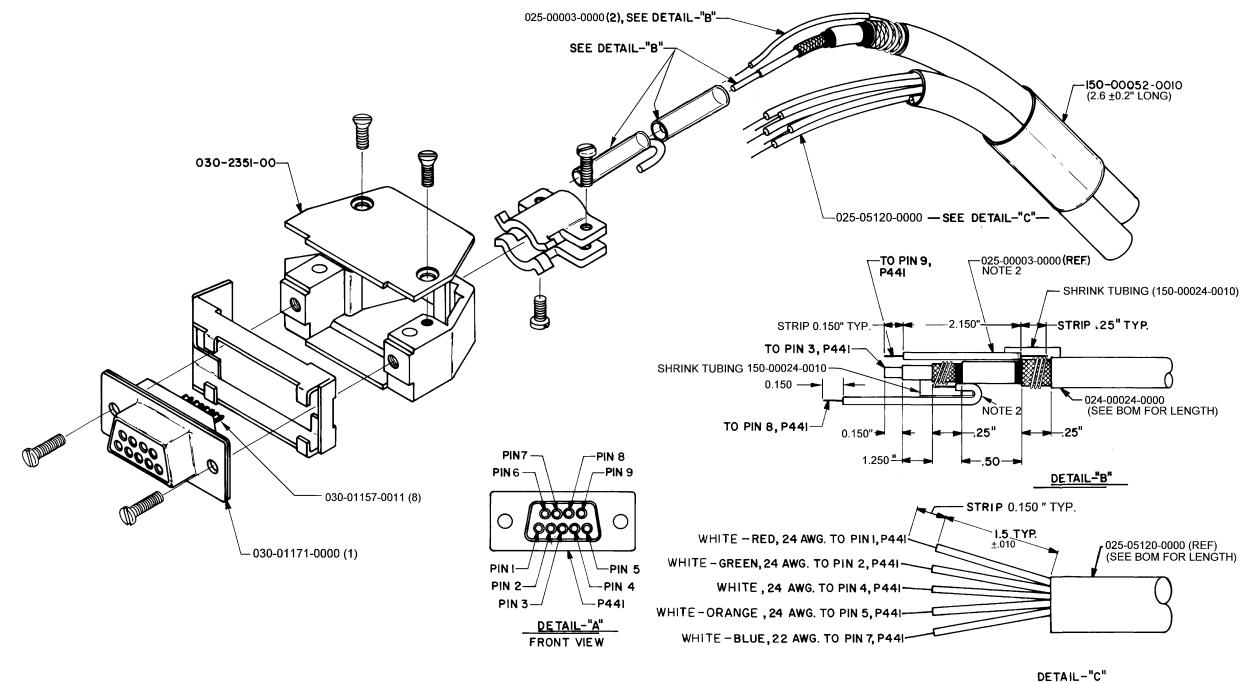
KA 44B OUTLINE AND MOUNTING DRAWING (Dwg No 155-05334-0000 R-9)
